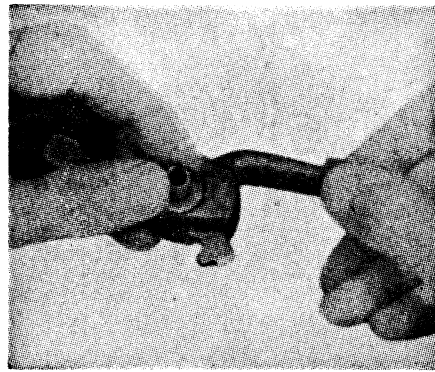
Series AJ. Assembling bushing in rocker arm and link parts
